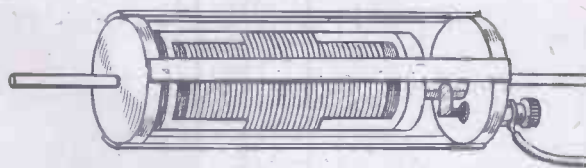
The completed electric motor, showing the bearing plates, soft iron strips and brush.
